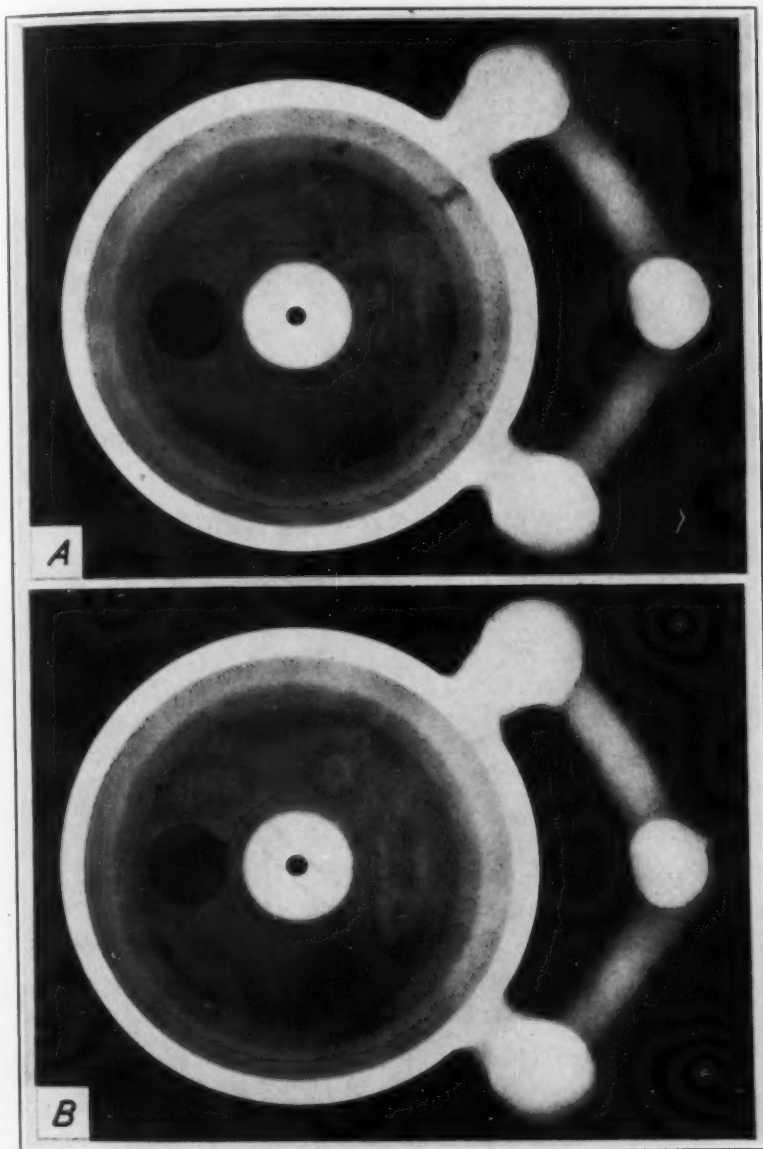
A—Aluminum Alloy Sand Casting Poured with Ladle 12 Inches Above Mold.
